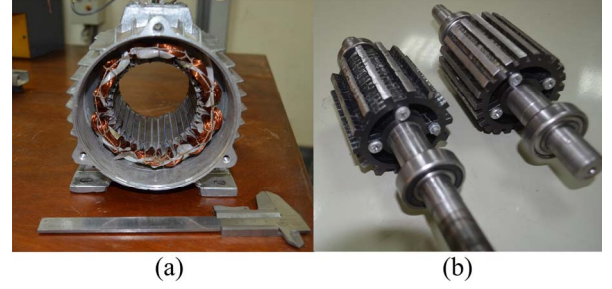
Prototyping of the proposed FSG. (a) assembled stator. (b) assembled rotors.
